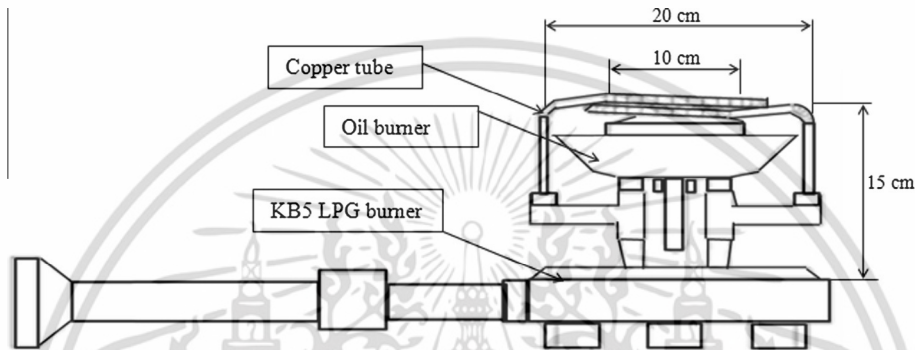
The dimension of an early version of WVO burner with oil vapourizer unit.
